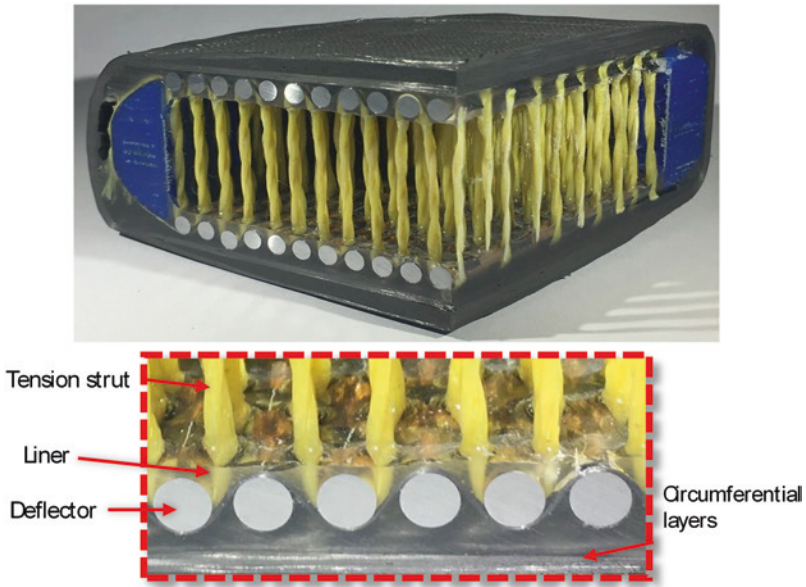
Manufactured prototype of the 3D weaving in sectional view
